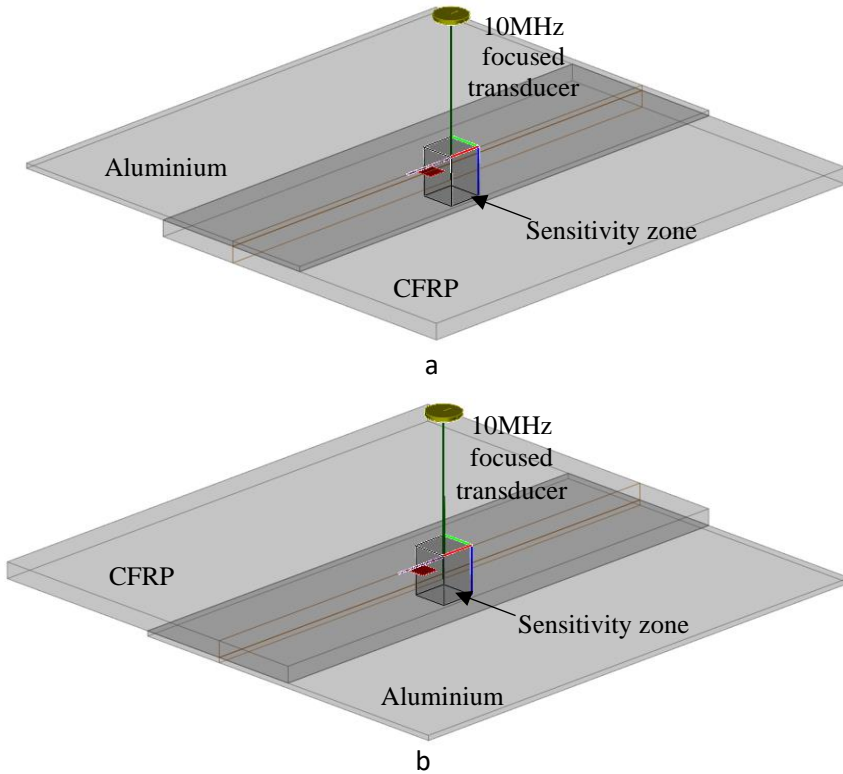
Set-up of inspection configurations for aluminium-CFRP joint: (a) inspection from the aluminium side, (b) inspection from the CFRP side
